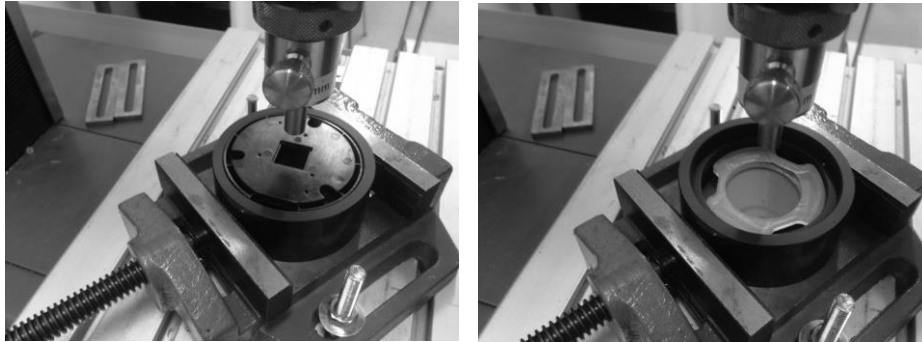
a) Push-out fixture b) a pushed sample with PCB holder removed.
